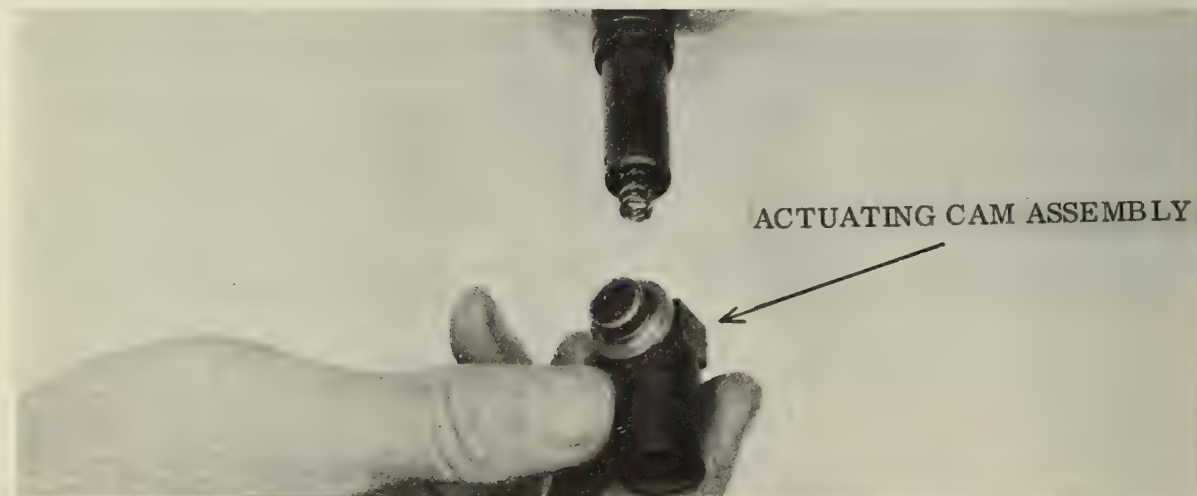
Removing/Replacing the Actuating Cam Assembly.
